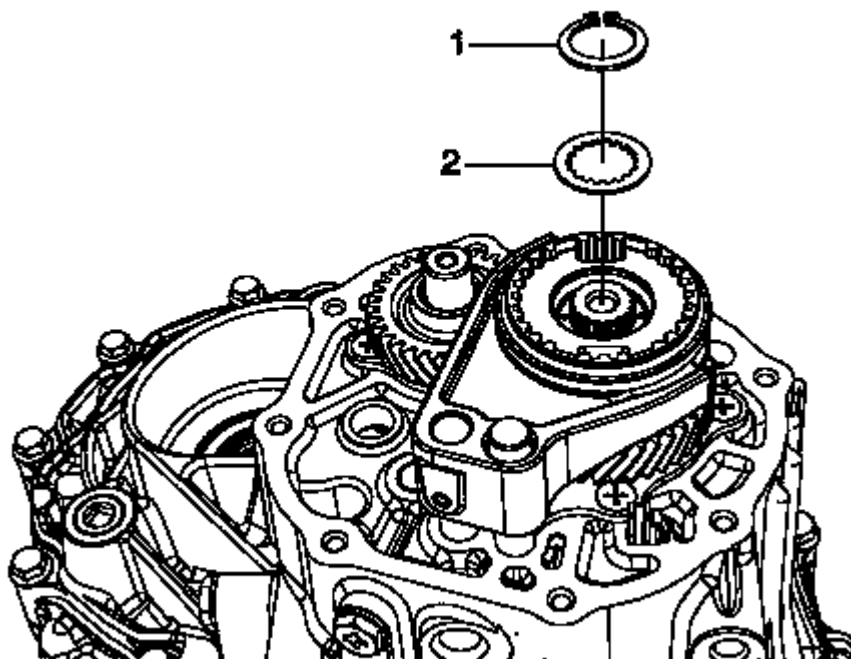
Exploded View Of 5th Gear Synchronizer Hub Plate
